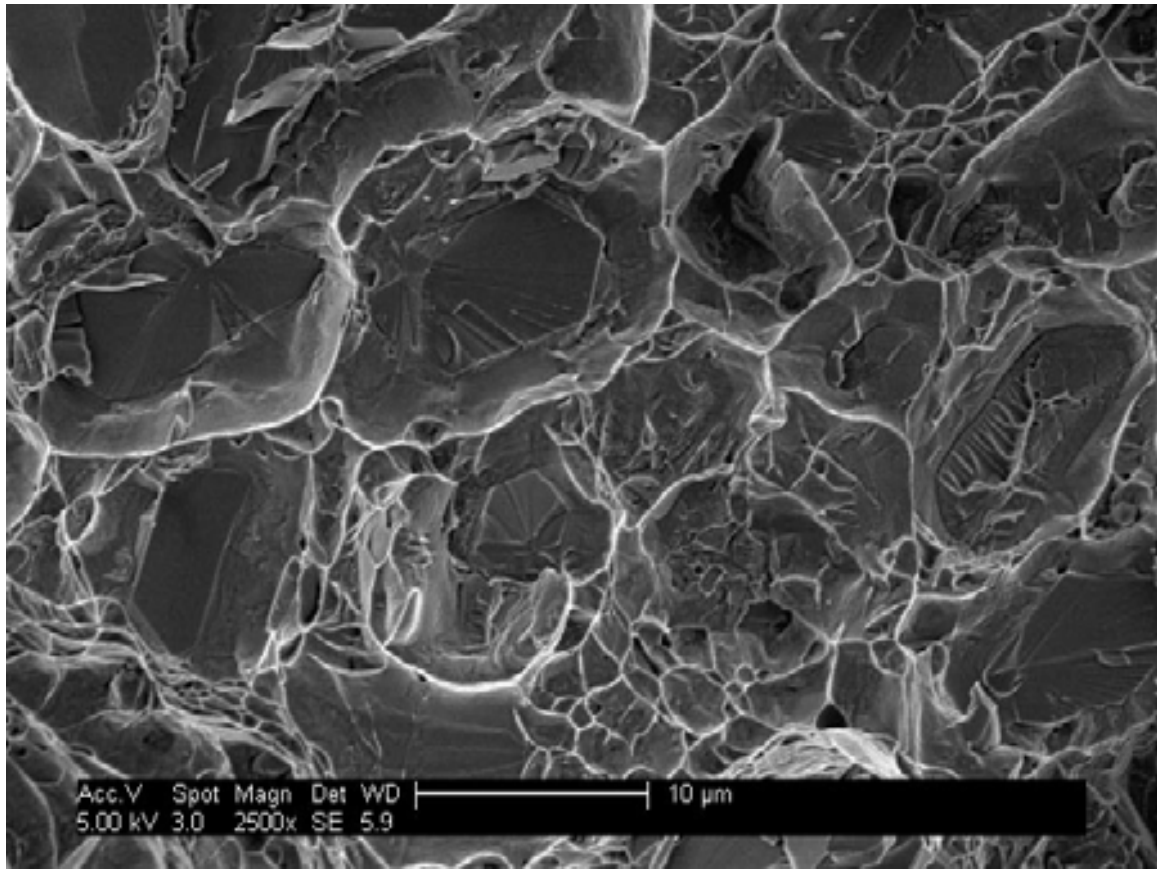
Fracture surface of extruded Ti-6Al-4V-2.9B composite showing brittle fracture across the width of TiB whiskers with roughly hexagonal cross-sections aligned with the extrusion direction.
